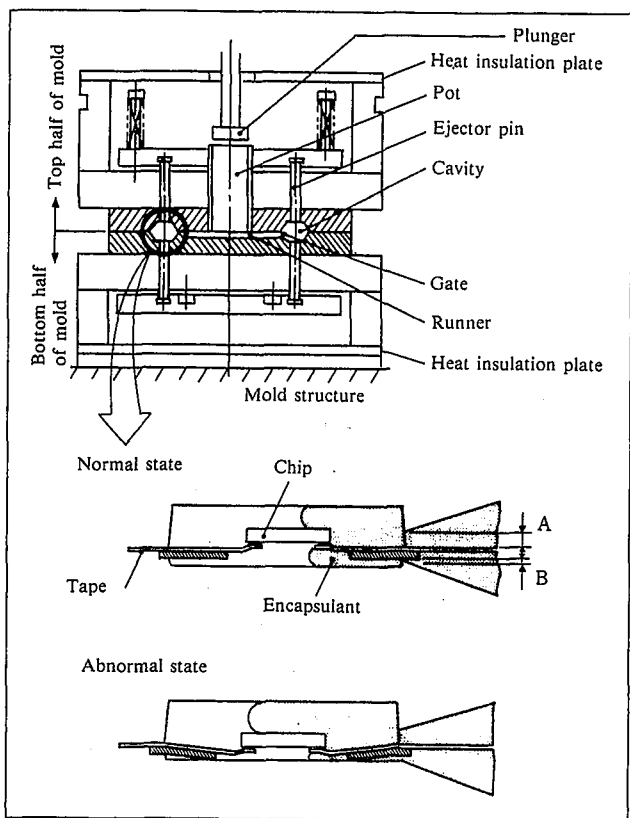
Model of LSI chip movement in mold cavity during transfer molding
